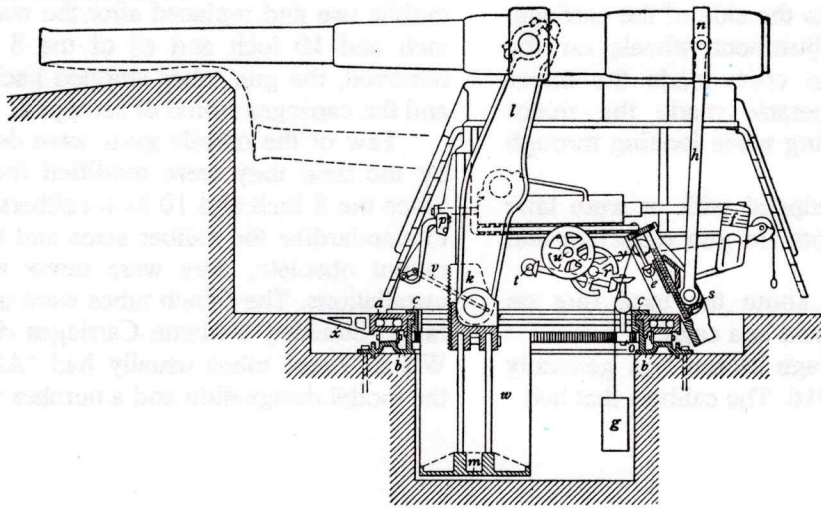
12-inch Gun on Disappearing Carriage, Firing Position.
